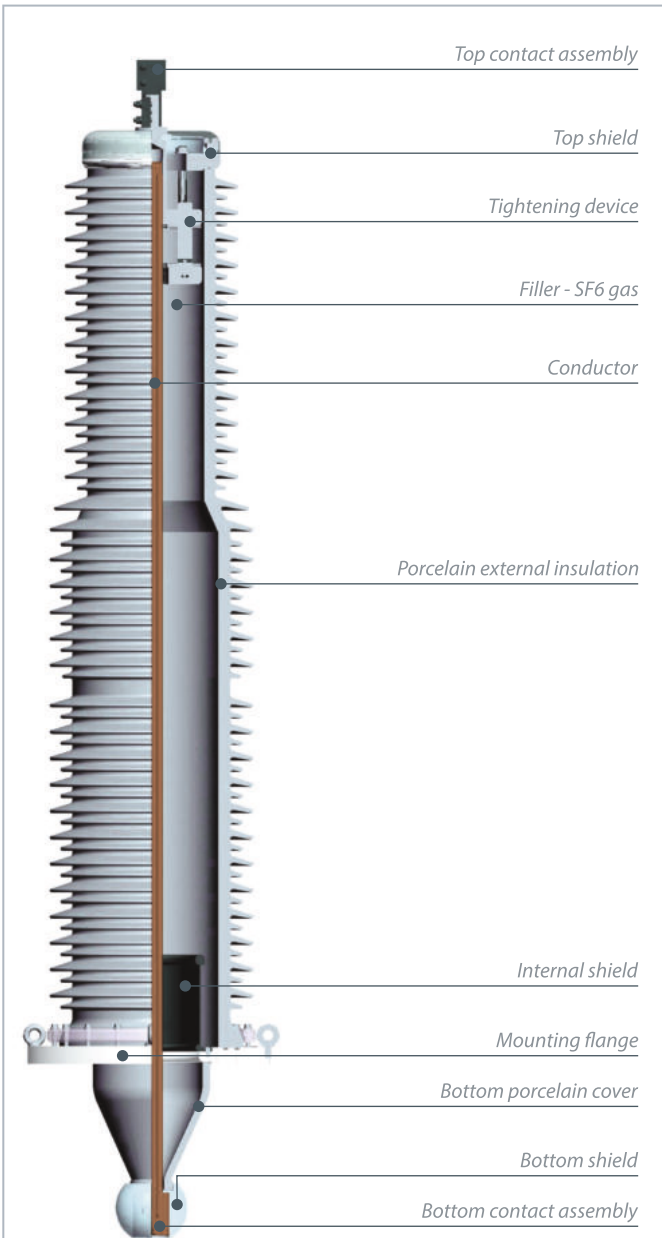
SF6 - Air gas-insulated bushing for switchgear
